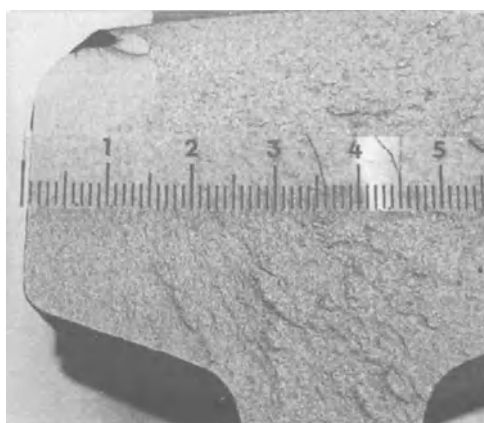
Transverse fracture surface of a rail with typical head checks, failed in the bending fatigue test
